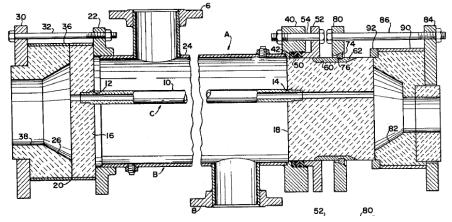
A shell-and-tube type heat exchanger with a removable graphite tube bundle [146]
